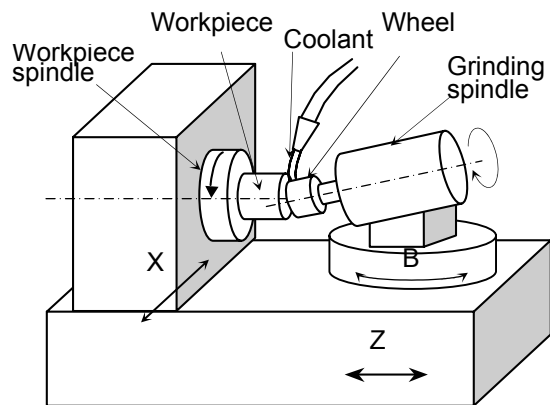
Tool path in parallel-grinding of simultaneous 3-axes (X, Z, B) control
